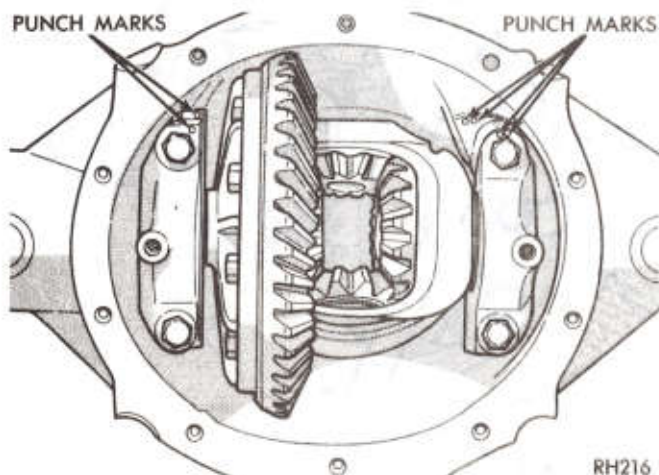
Marking Bearing Caps and Housing for Proper Identification
